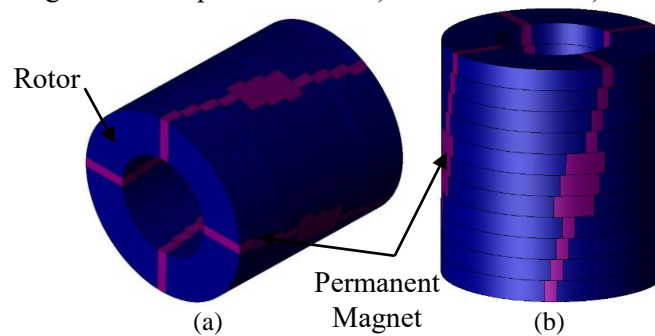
SkApp rotor model a) Isometric view b) Rotor top view
